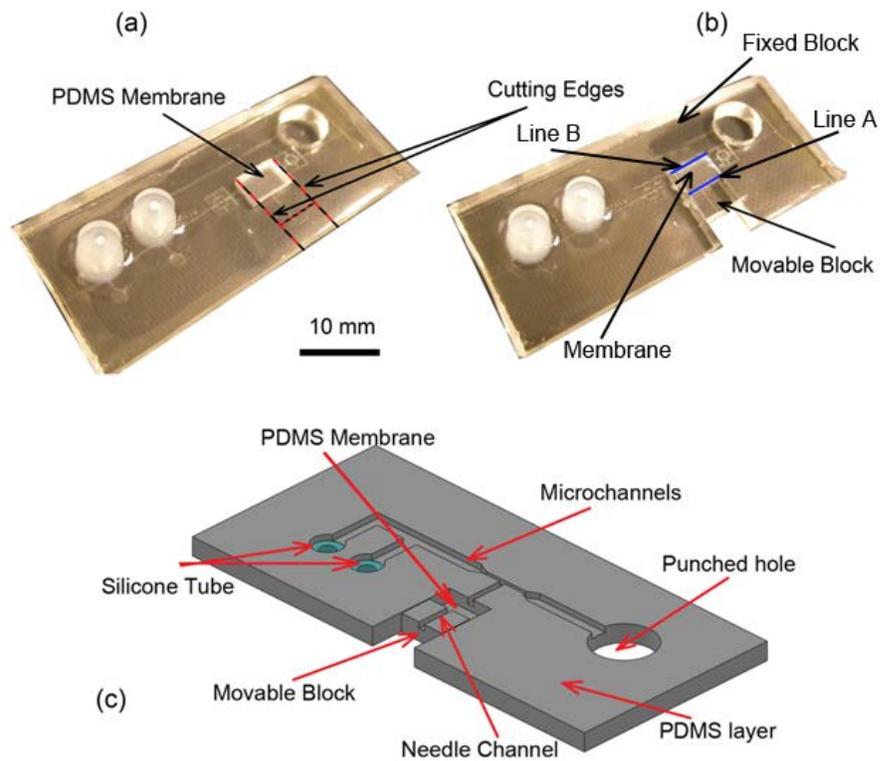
11: Steps and schematic of PDMS chip cutting and pouching a) The PDMS chip after trimming and pouching. b) The PDMS chip after cutting and releasing the movable block. c) Schematic of different parts of the PDMS chip after casting
